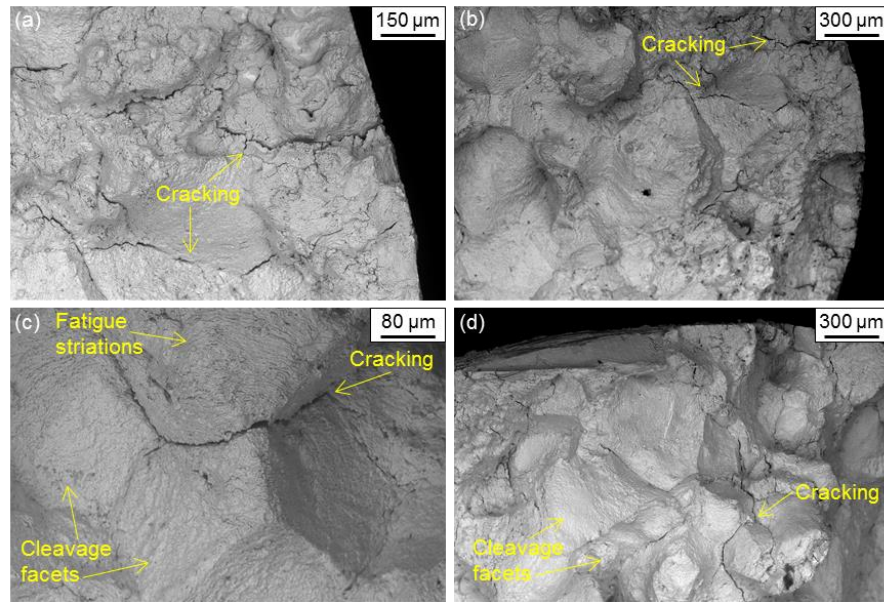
(a – d) Cracking and cleavage facets on the fracture surface of the CF cast MarBN sample tested at 650 °C.
